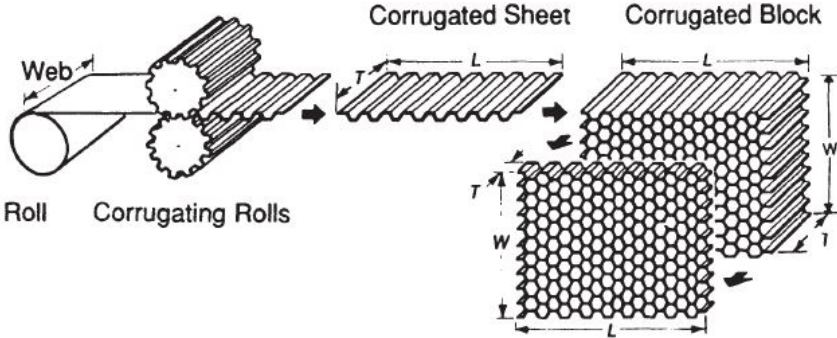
Manufacturing of a honeycomb core using adhesive bonding and the corrugation method [7]
